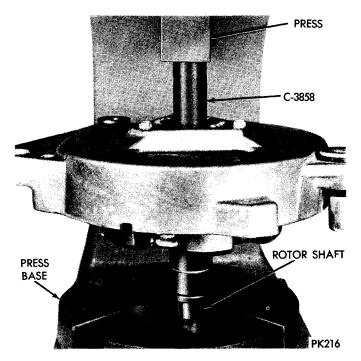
Installing Drive End Shield Bearing end bearing. Do not exceed 6800 pounds pressure. Do not hammer.
